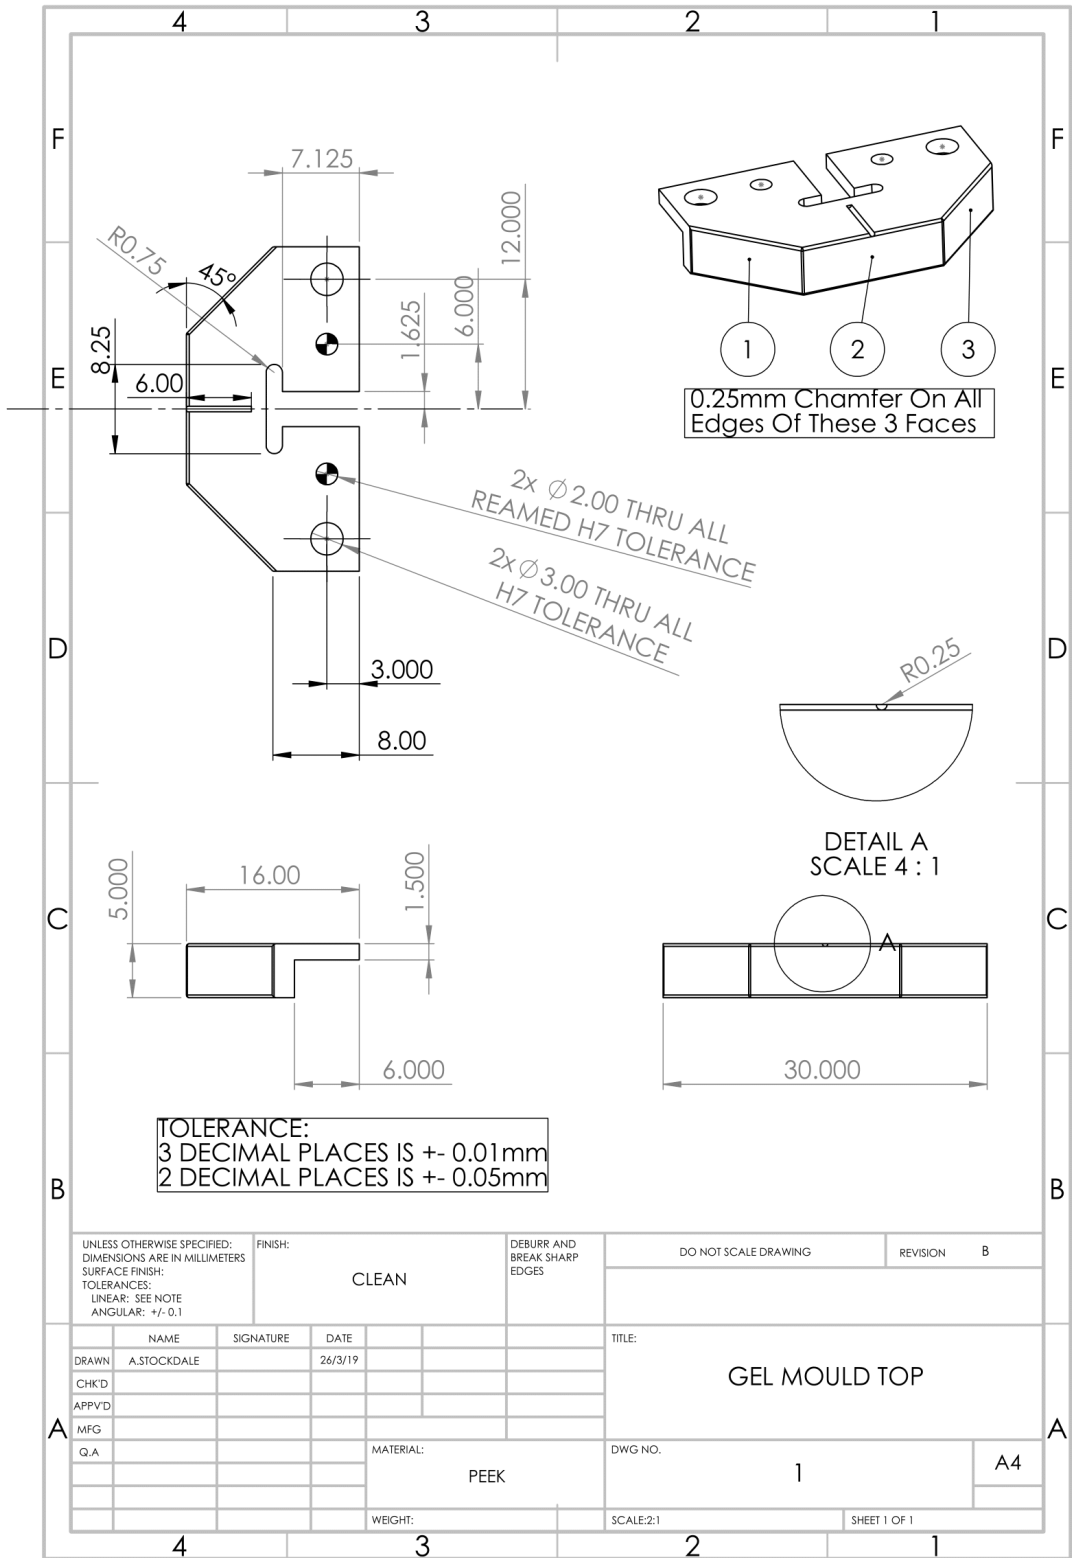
CAD drawing of the top piece of the distraction mould.
